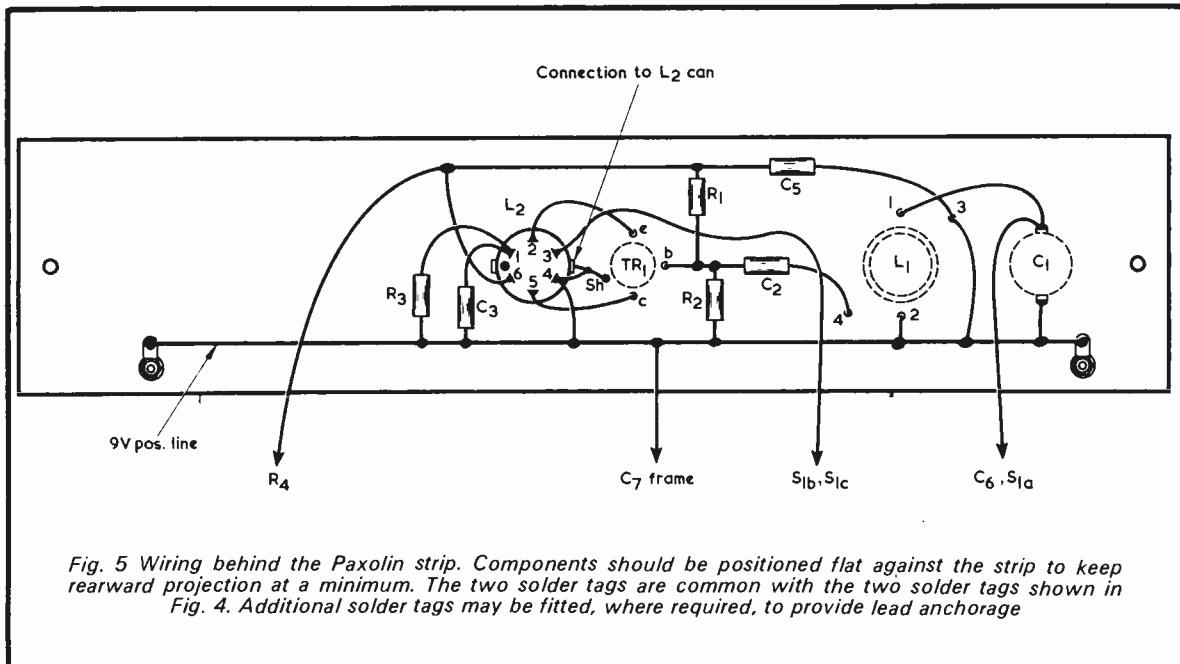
Wiring behind the Paxolin strip. Components should be positioned flat against the strip to keep rearward projection at a minimum. The two solder tags are common with the two solder tags shown in Fig. 4. Additional solder tags may be fitted, where required, to provide lead anchorage
